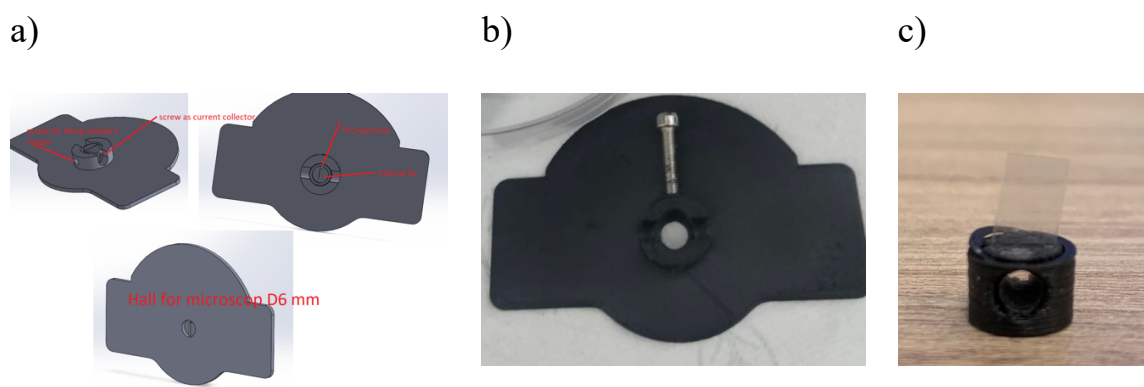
a) 3D-printed holder design, b) holder platform, and c) holder with a sample, used for cross-sectional c-AFM analysis
